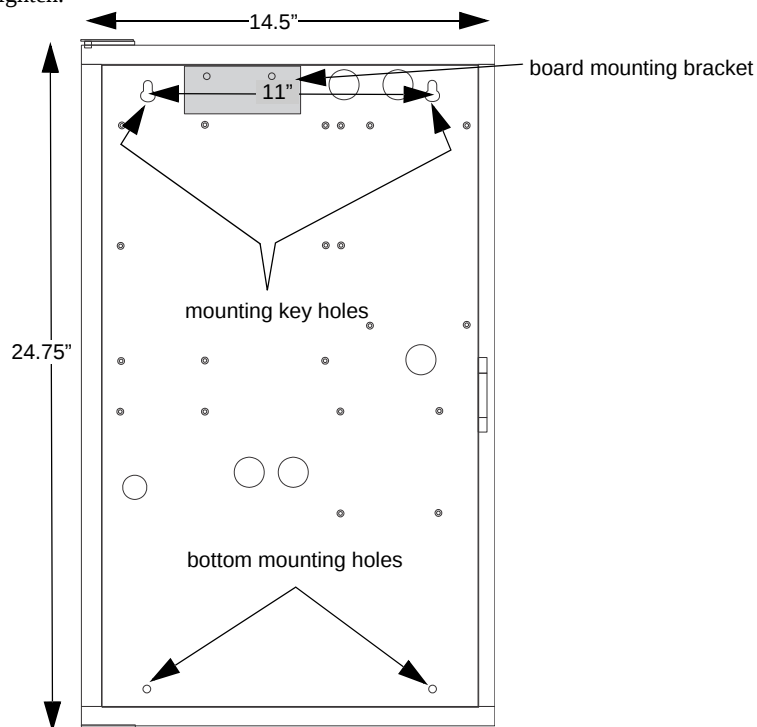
Cabinet Flush-Mount Dimensions and Mounting Hole Locations
